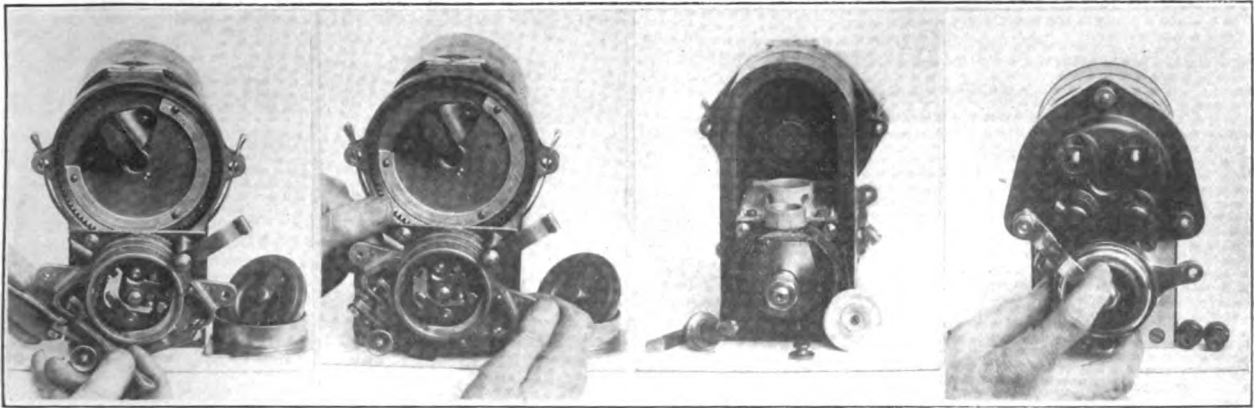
Test Gap with Wrench Gauge and Tighten the Locking Nut on the Adjustable Screw.
